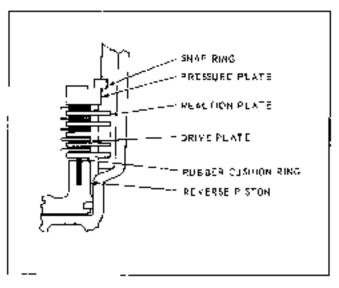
F-89 Reverse Clotch Fock Assembly Sequence
